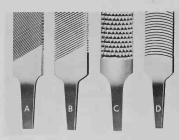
Cuts of files: (A) Single cut; (B) Double cut; (C)
